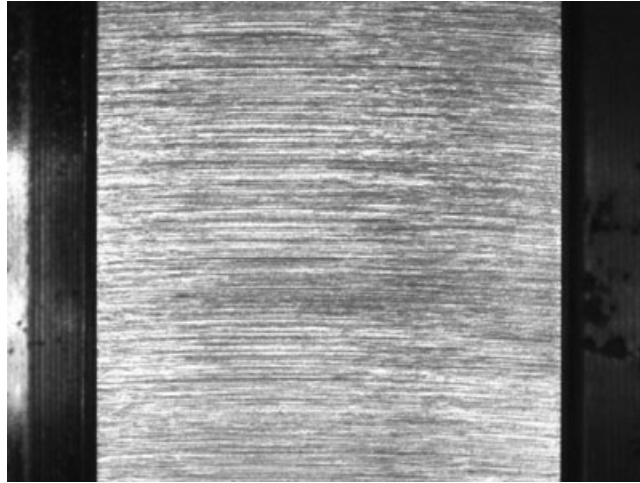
The test disc surface has been finished perpendicular to the rotating direction
